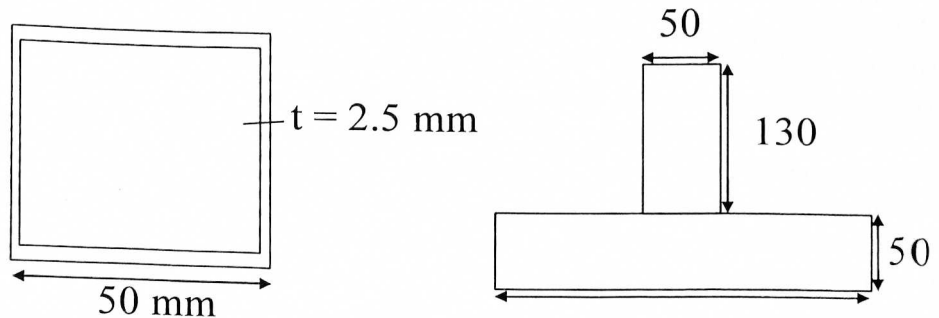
a) Cross-section of the beam; b) Welded component with vertical and horizontal beams A and B
